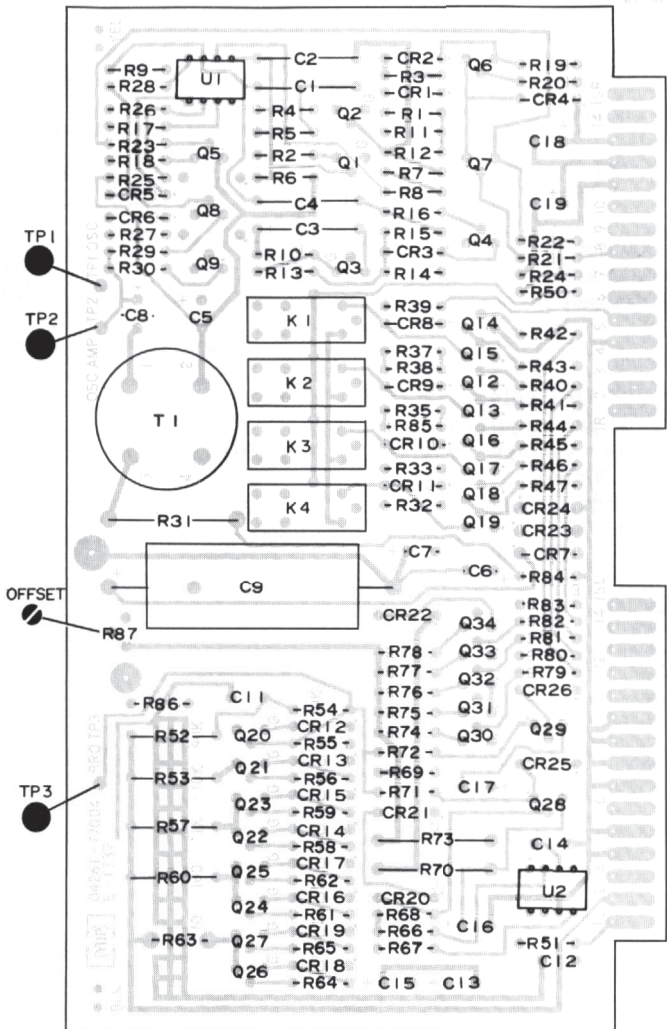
A4 Oscillator/Range Resistor Board Assembly Component Locations.
